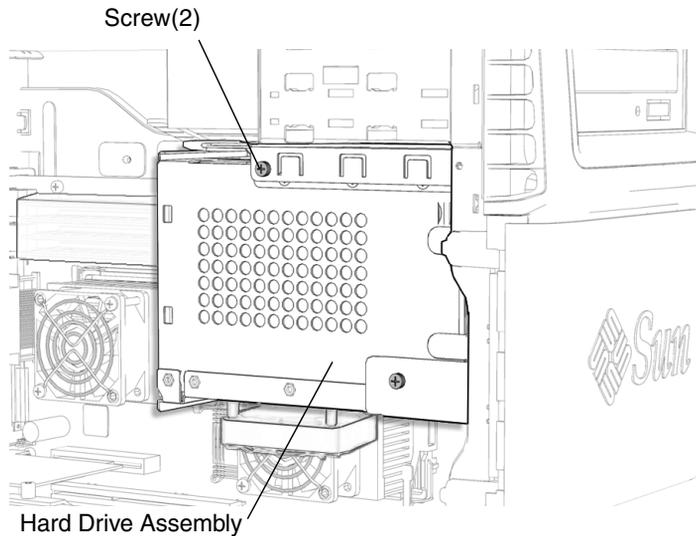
Removing the Screws for the Hard Drive Assembly
